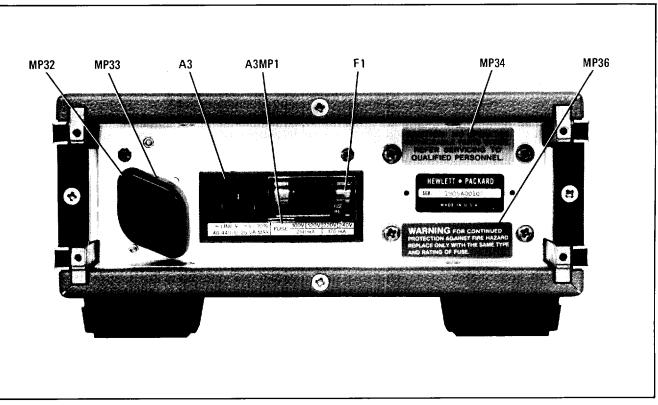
Chassis and Mechanical Parts Identification Rear Panel
